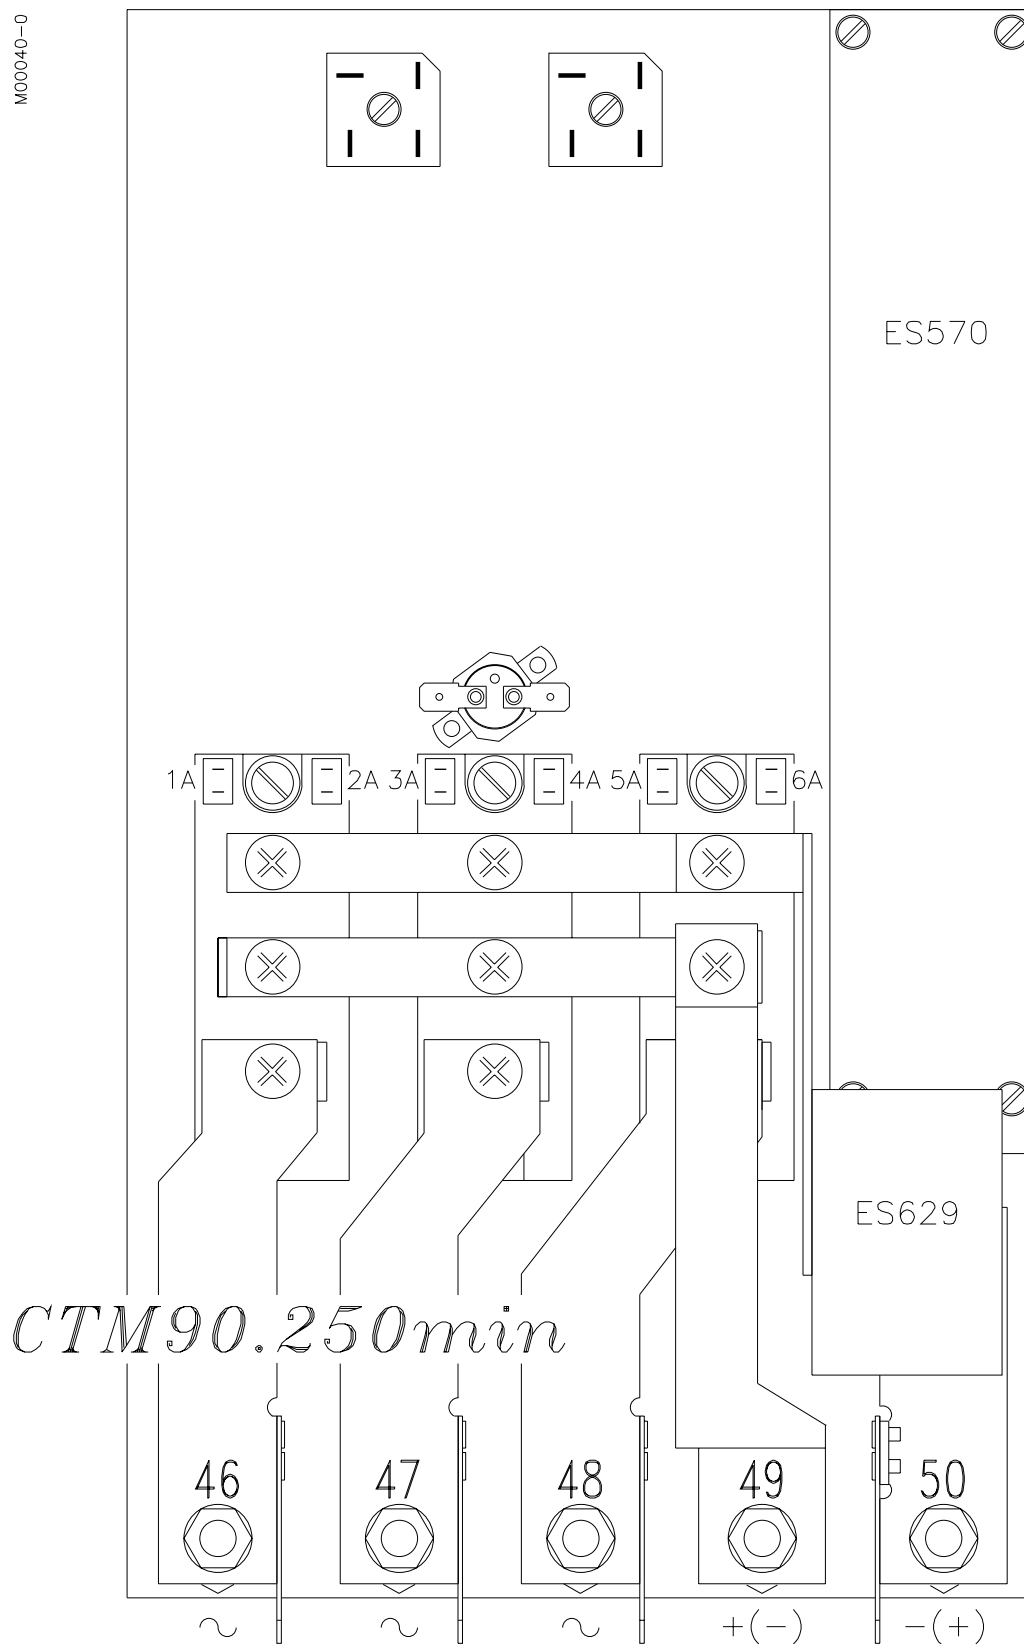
CTM90 size 1 250A min. - Power Section lay out -
